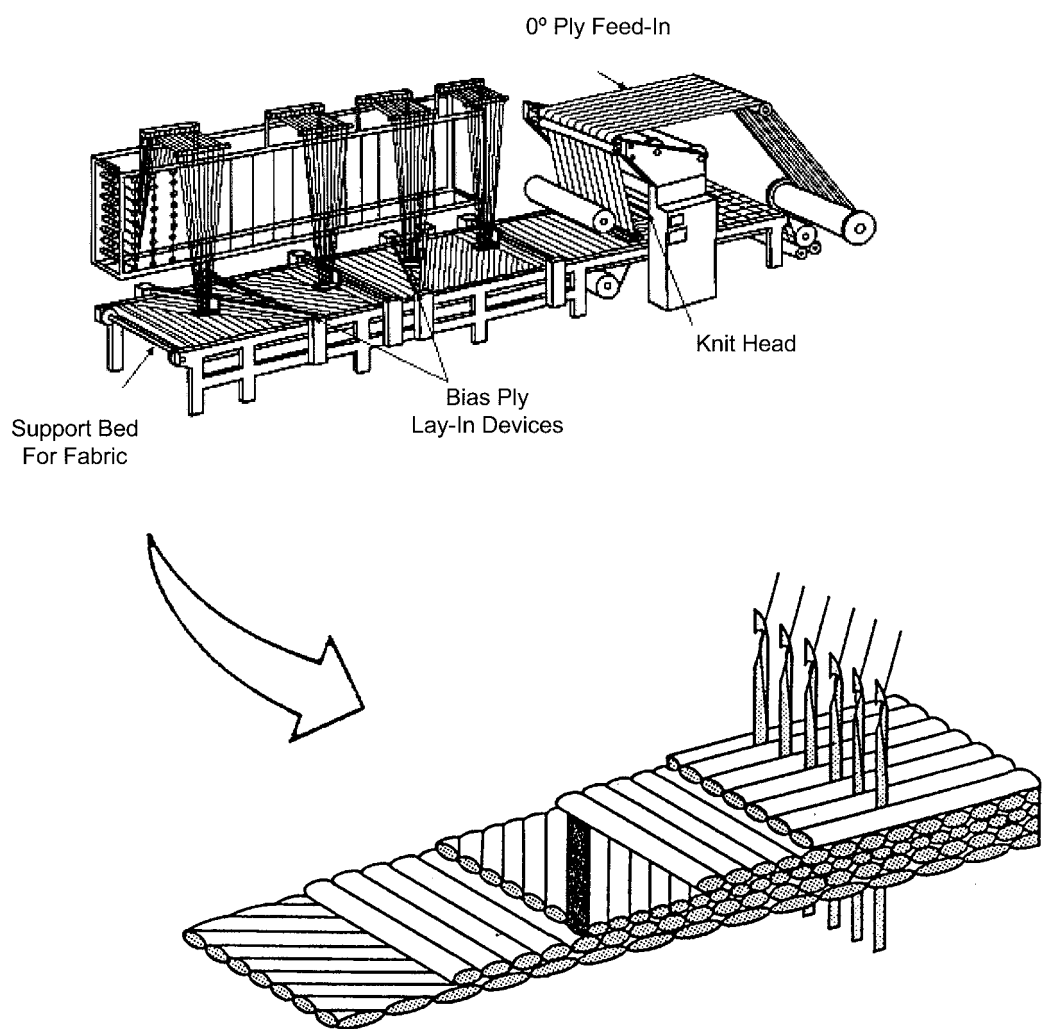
Libra™ warp knitting machine and typical product form produced. Source: Ref 11
